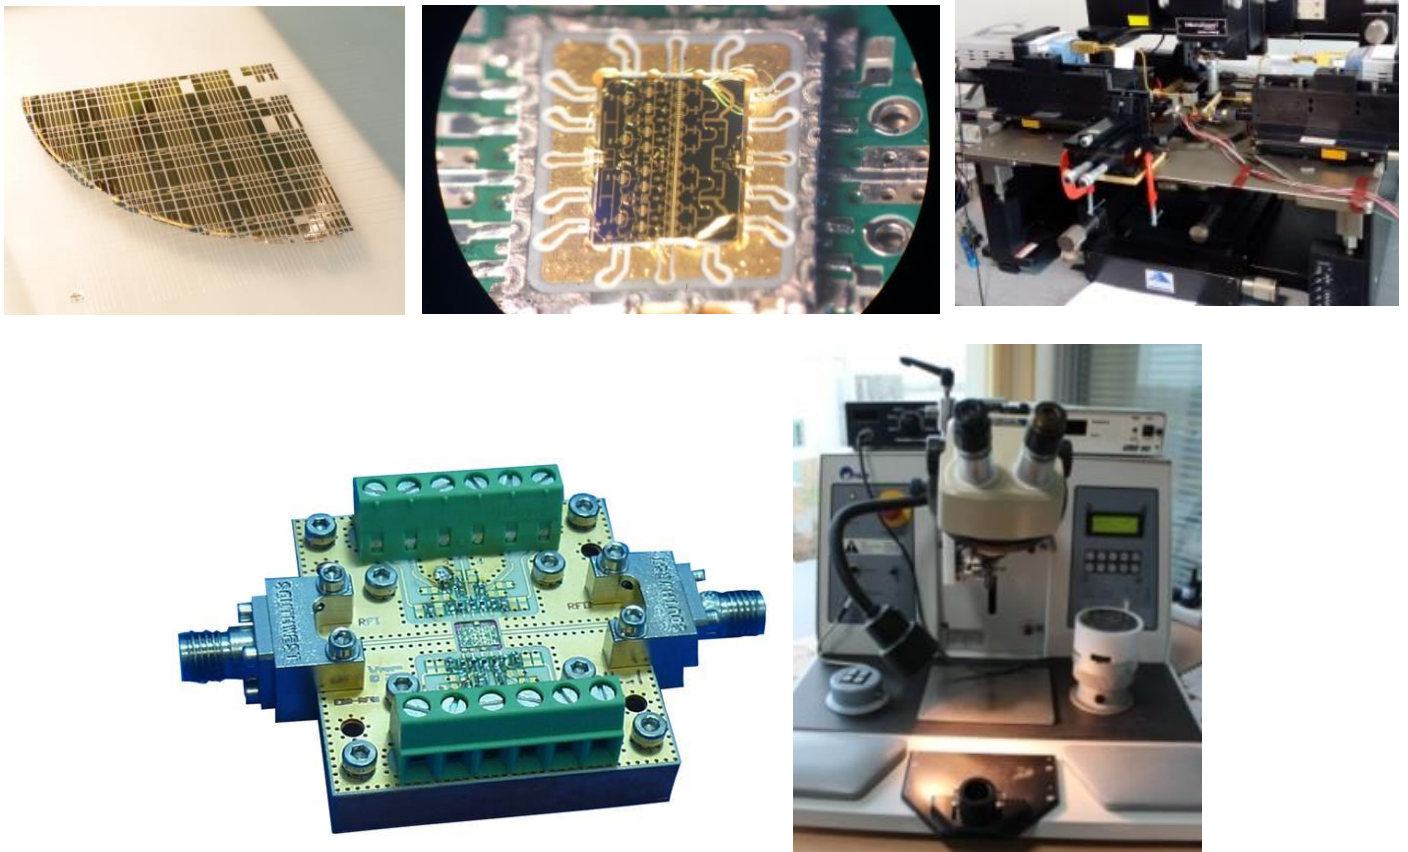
C-W from top left: GaN wafer, packaged MMIC, wafer-prober, wire-bonder, wafer test jig
